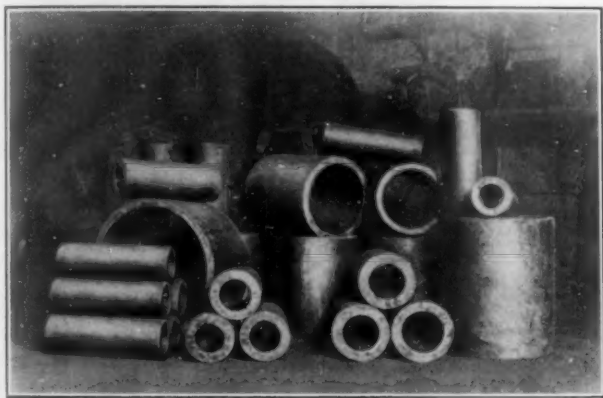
BUSHINGS FOR PISTON ROD PACKINGS.
